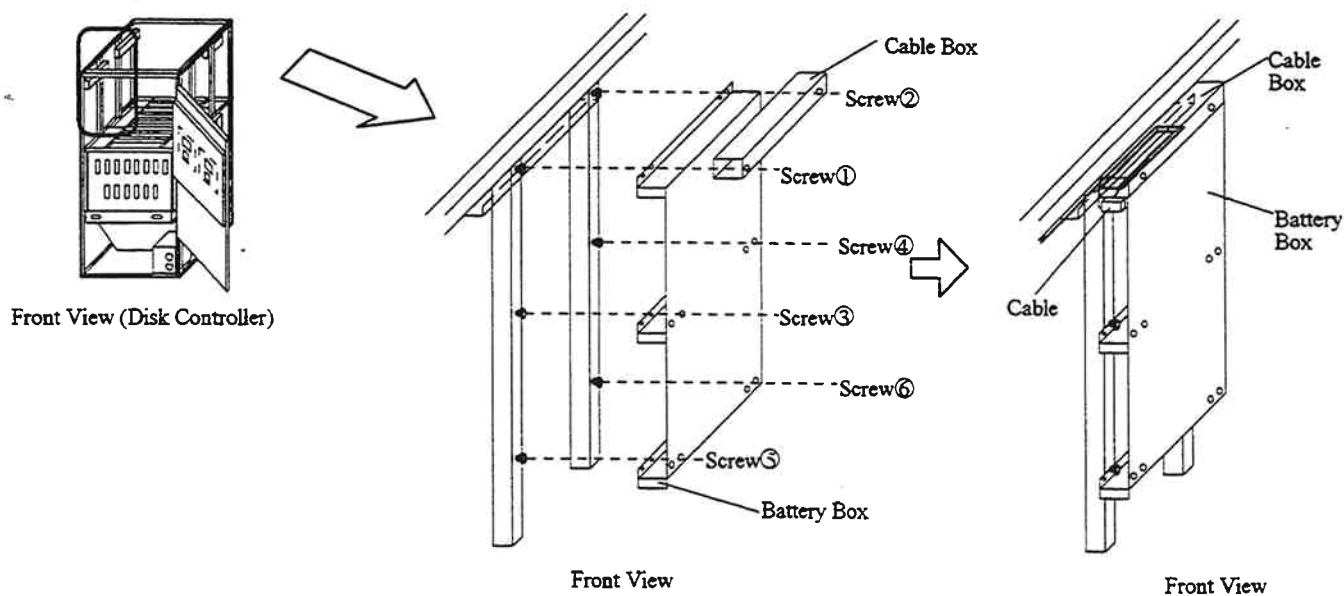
Attachment of the Battery Box
